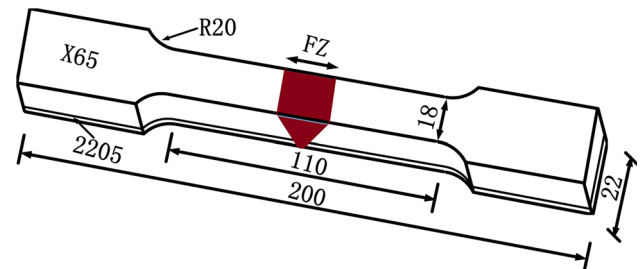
Dimensions of the tensile specimen (unit: mm)
